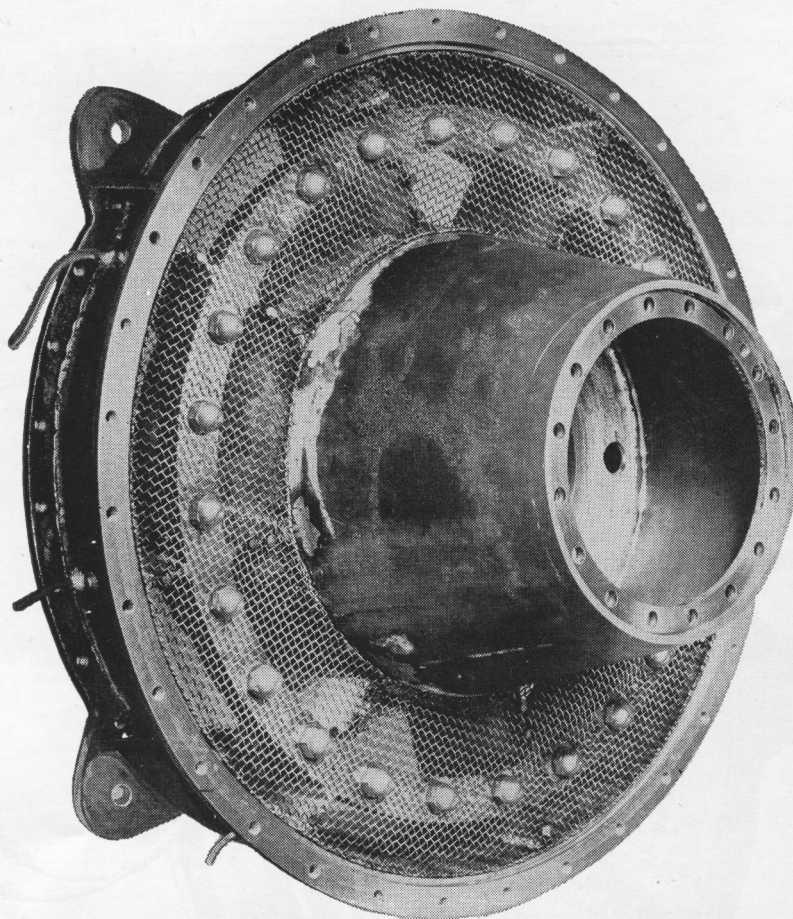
A rear view of the fuel manifold support showing the screen which creates turbulence as air enters the combustion chamber, and giving the location of fuel nozzles, seen with protecting caps in place.
